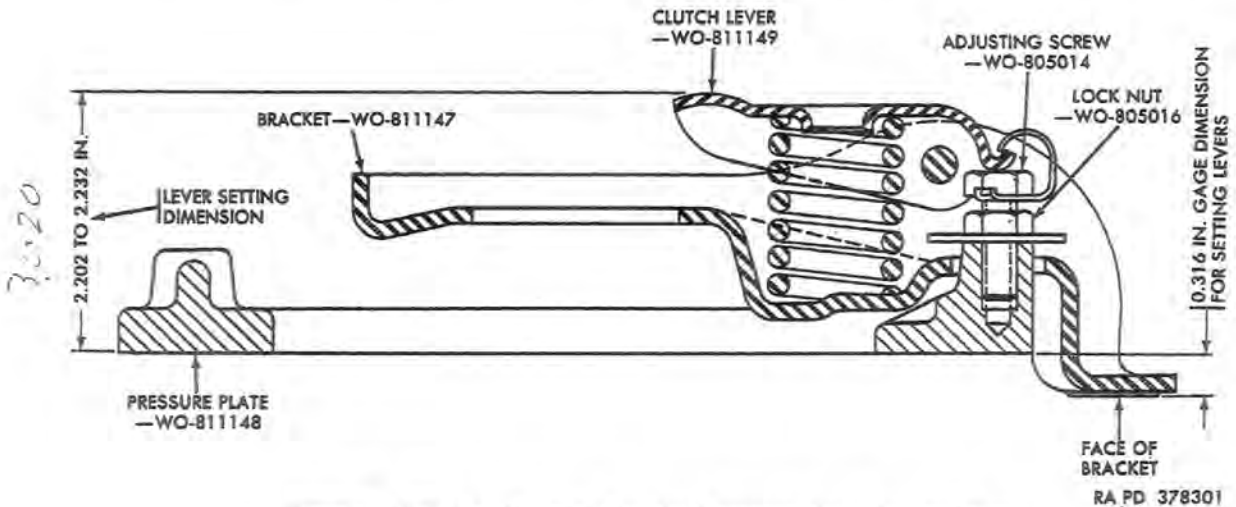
Points of adjustment for clutch pressure plate—Sectional view.
